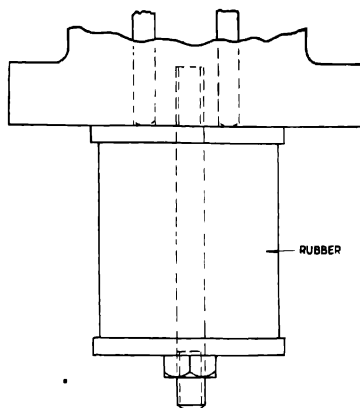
Rubber buffer for bending; used when bending heavy-gauge metal
